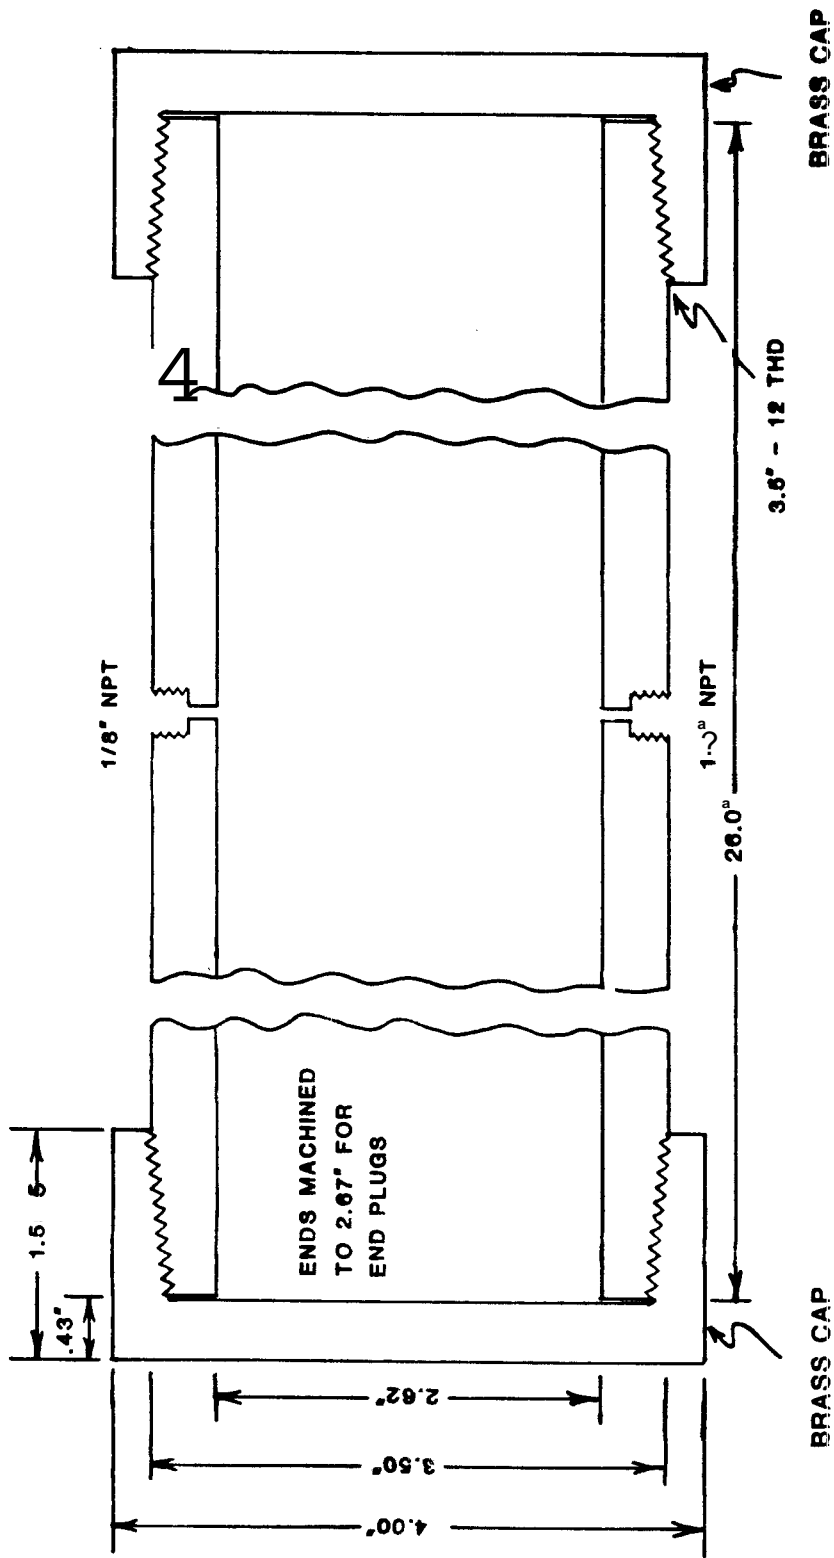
Dimensions of Cor® Holder Outer Shell Components
